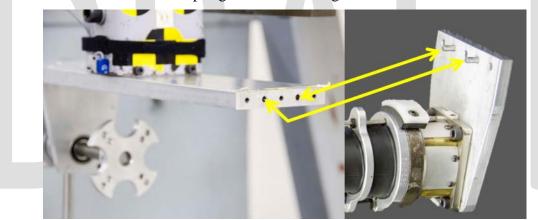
Alignment of locator pins with end plate of neck torsion fixture
